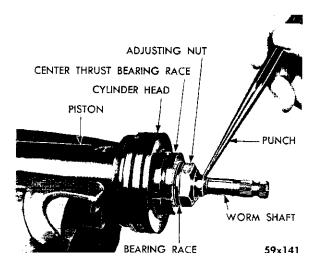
Staking the Worm Shaft Bearing Adjusting Nut
